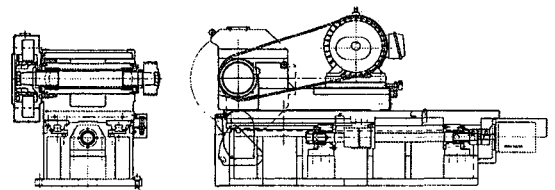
Drawing of modified head unit part for the cam profile CNC grinding machine
